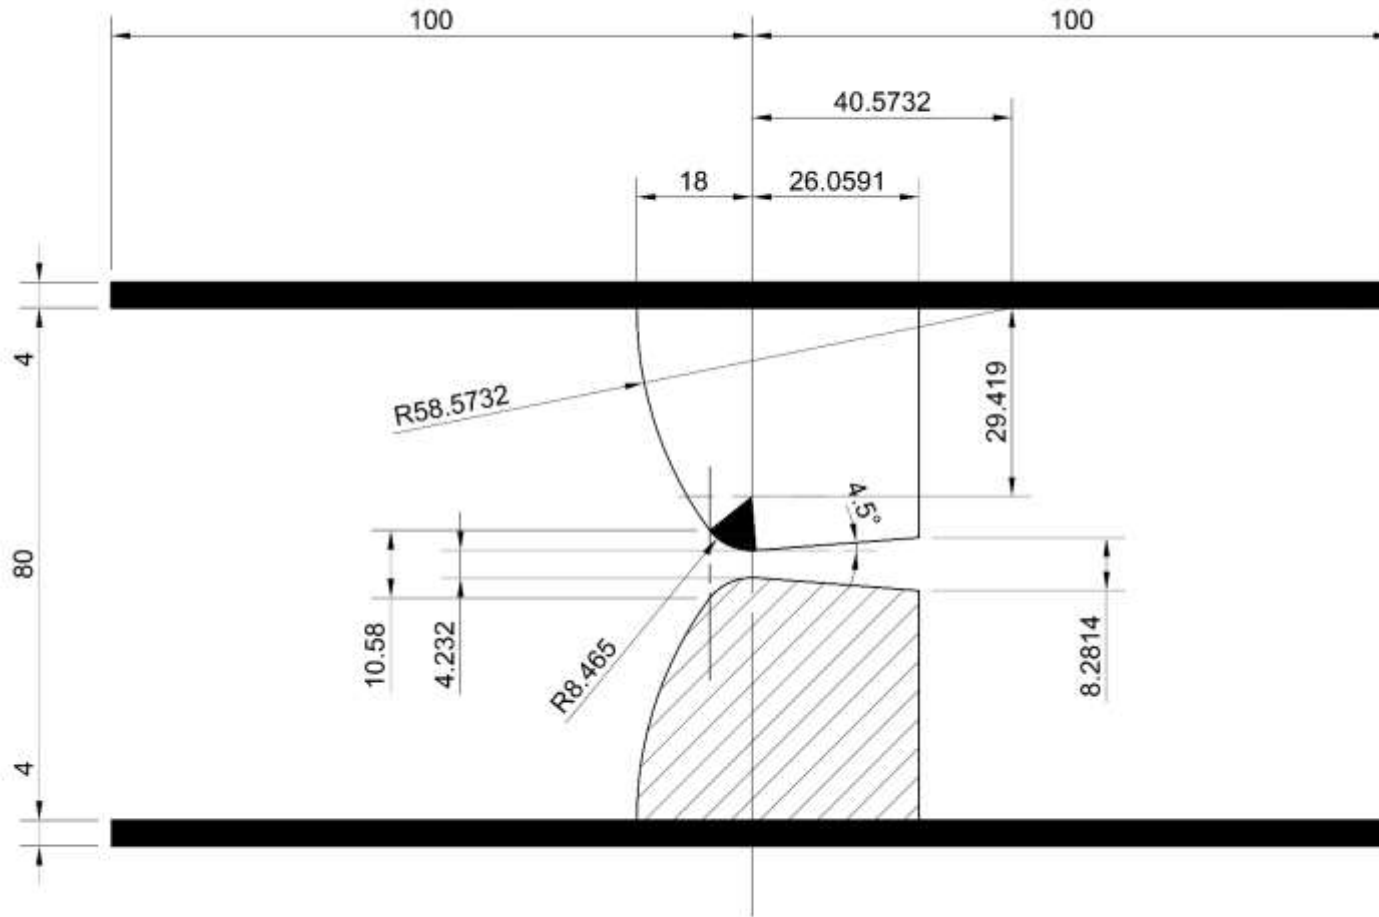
Design drawing of sonic nozzle for metering an air flow rate of 0.02 kg/s
